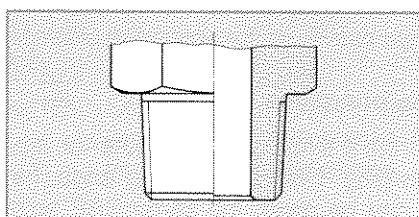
NPT thread, metal-to-metal seal, sealant necessary, high bursting forces, undefined position of pipe end.
